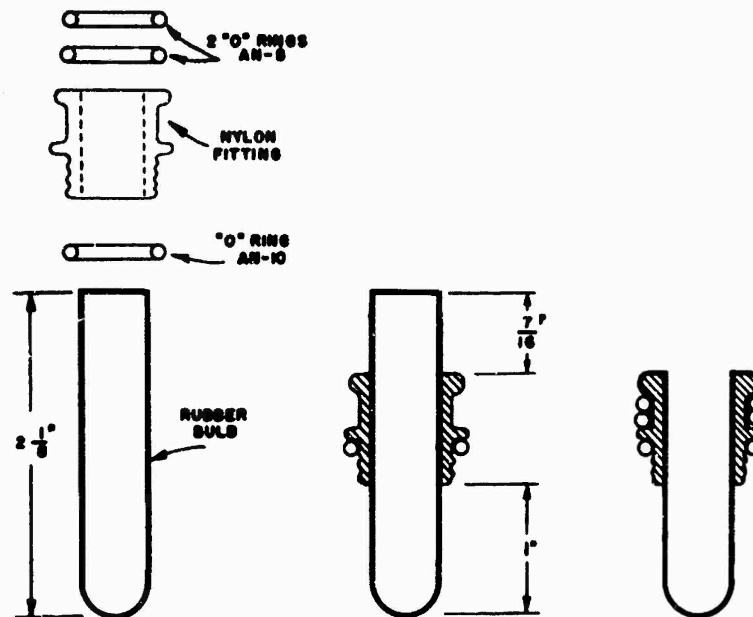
Electrically heated wet suit pressure-compensating mechanism
